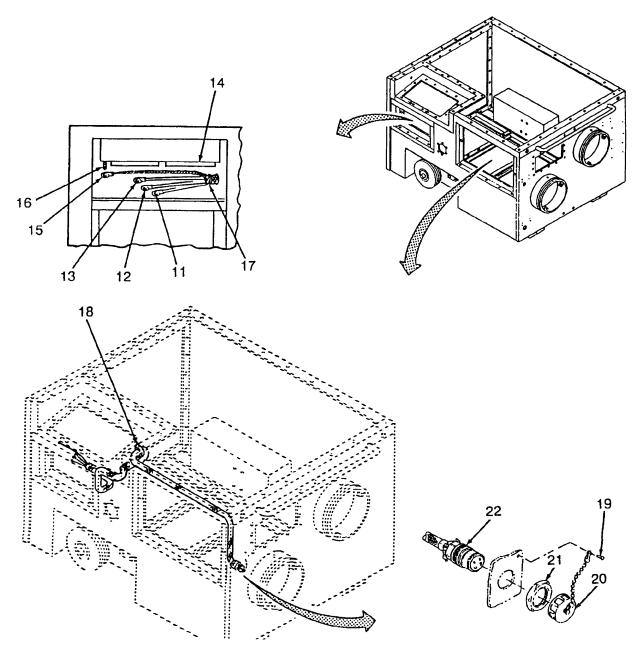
Frame Assembly Disassembly (Sheet 2 of 2)
